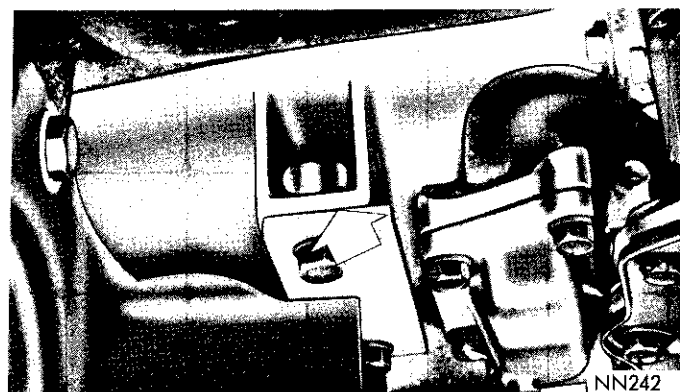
Shim Location (Front Universal Joint Angle Correction)
